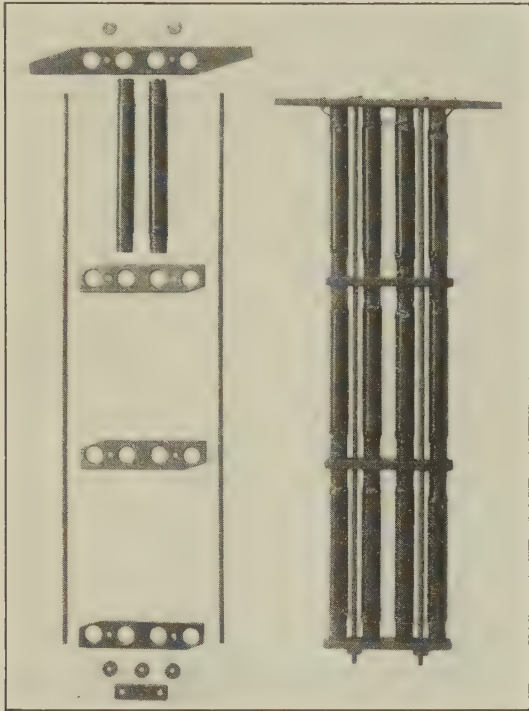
PARTS AND ASSEMBLY OF A 10,000-OHM RESISTOR SECTION
